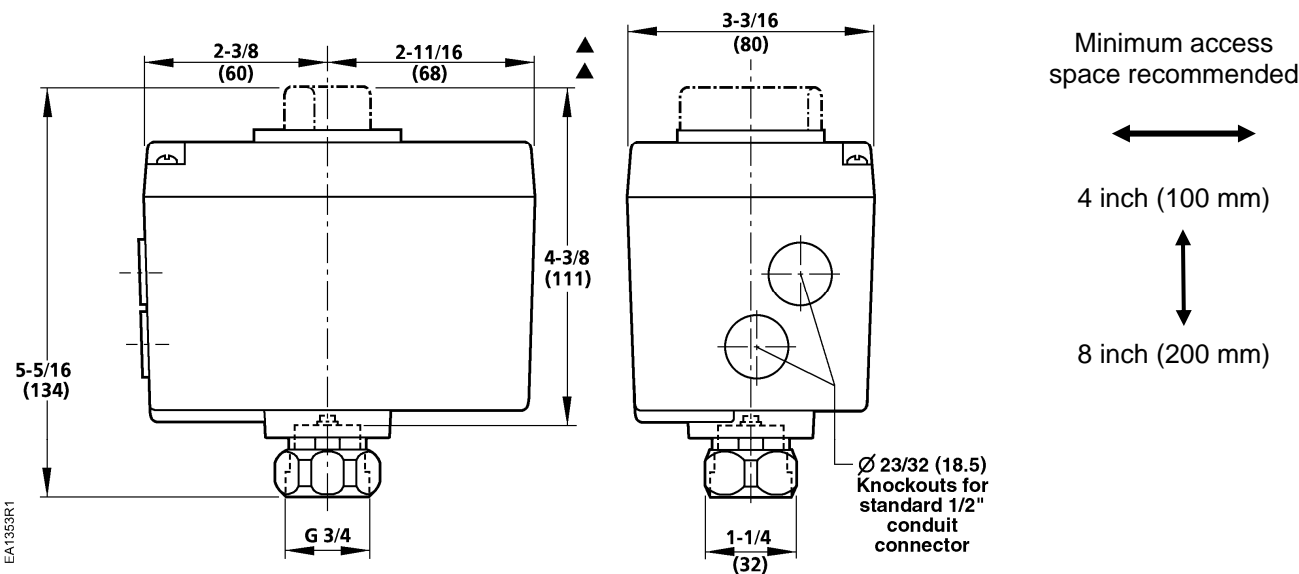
SQD Series Dimensions in Inches (Millimeters).
